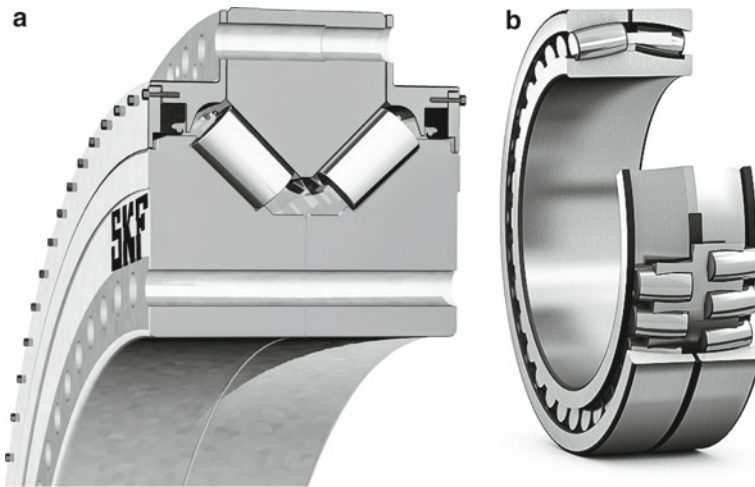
Types of bearings: Double-row tapered roller bearing Nautilus Plus (left), self-aligning rolling bearing (right) [SKF]
